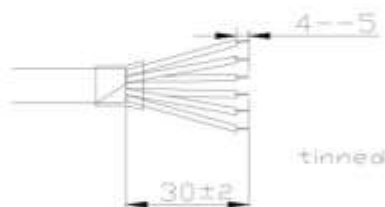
USB-RS232-WE Mechanical Details (dimensions in mm)
